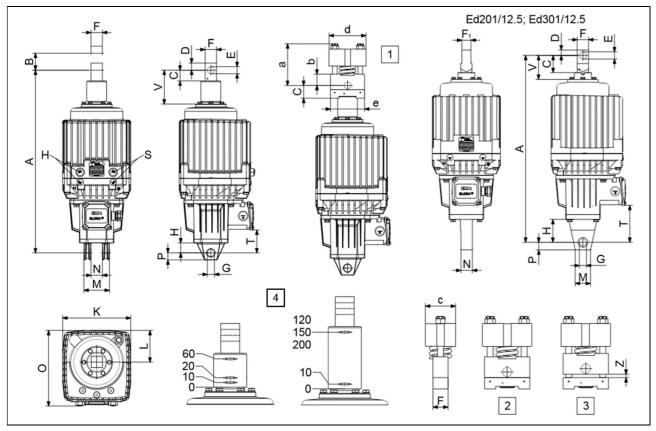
Dimensional drawing – example: Type Ed 201/12.5; Ed 301/12.5
